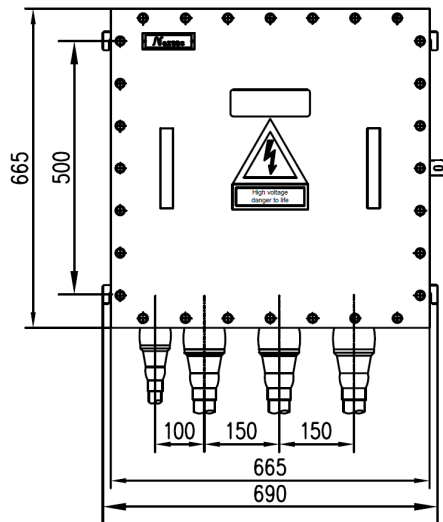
Engineering drawing of a Link box, all measurements are in cm.
